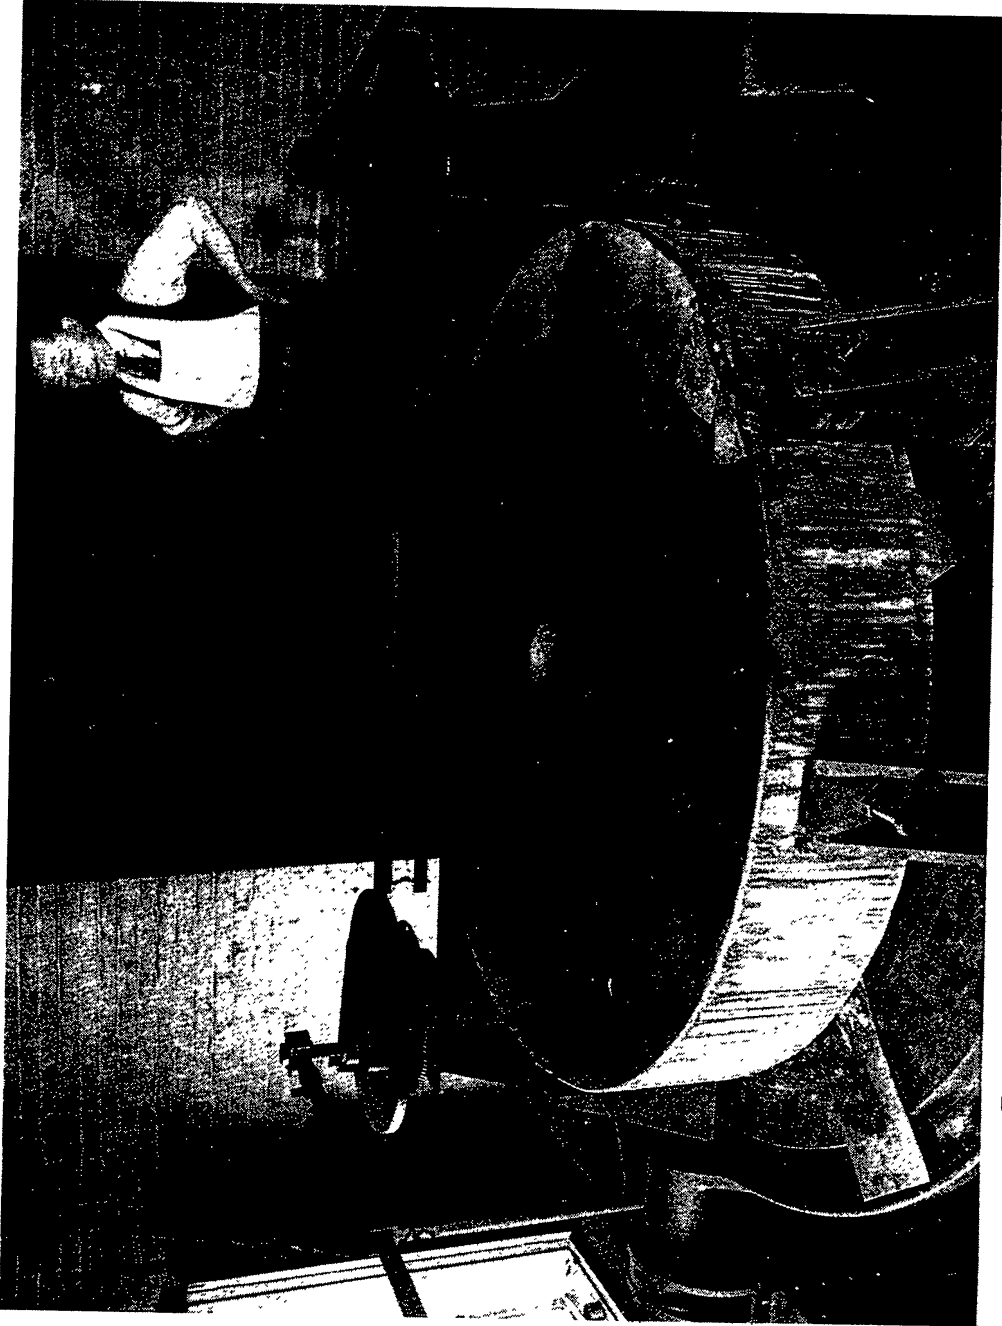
The raw disc first placed on the grinding machine at Grubb-Parsons.
